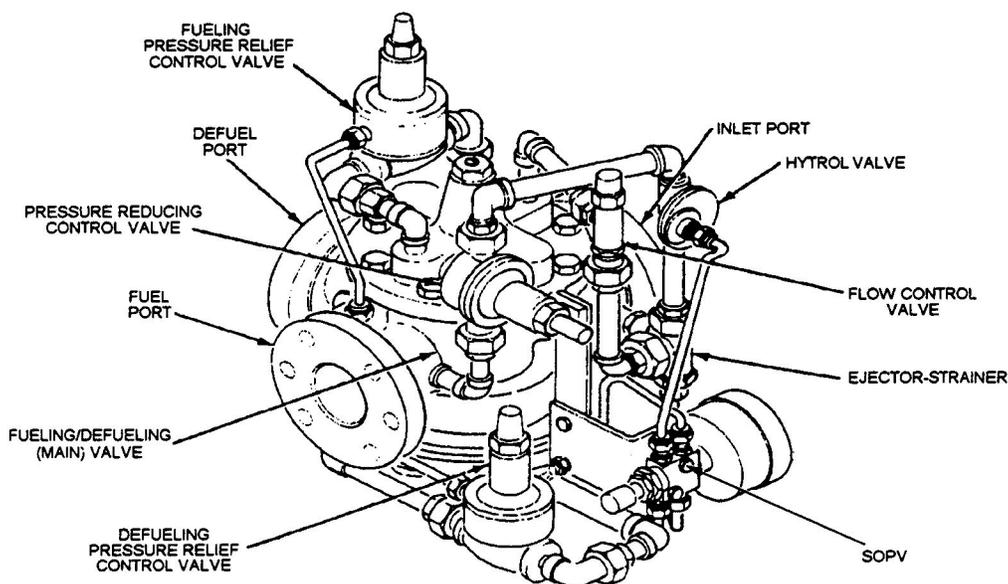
Cla-Val fuel/defuel valve assembly.
